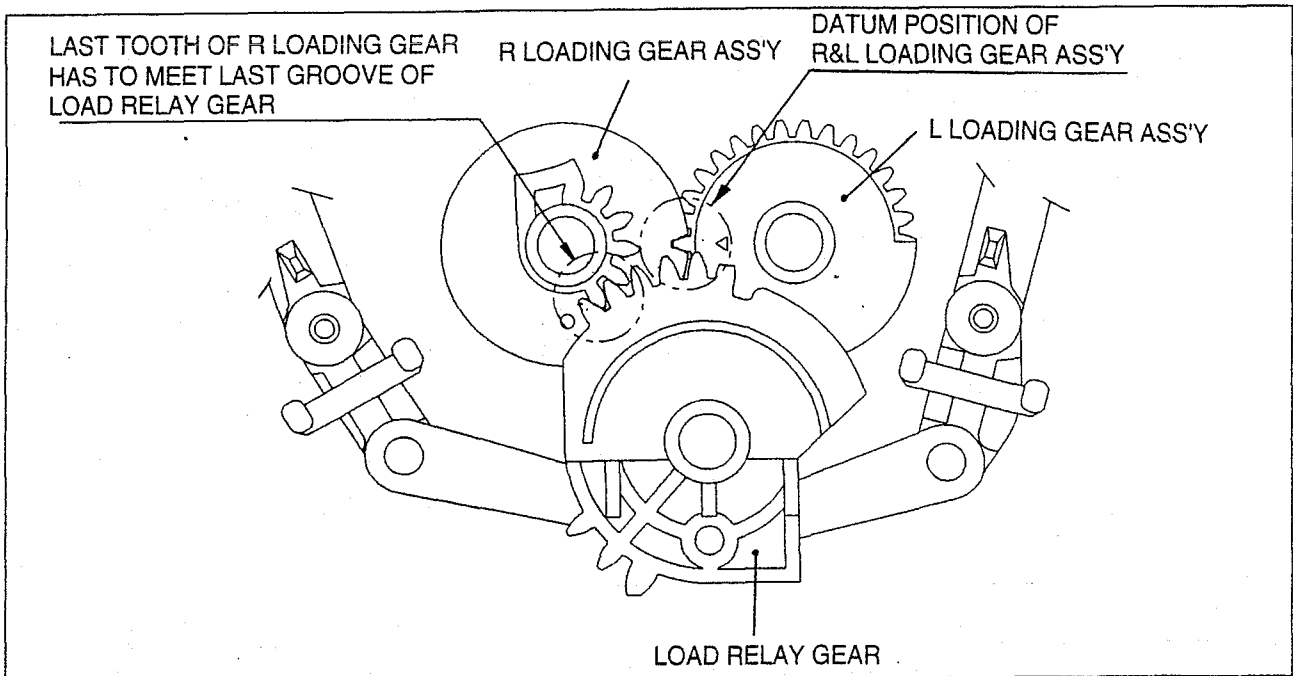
DATUM POSITION OF LOADING GEAR ASS'Y & LOAD RELAY GEAR
